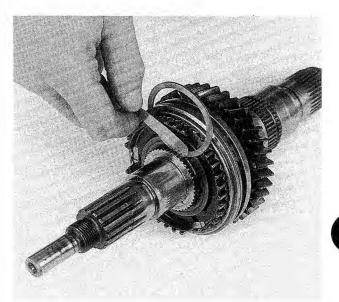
5th/reverse gear guide sleeve axial play being measured.
